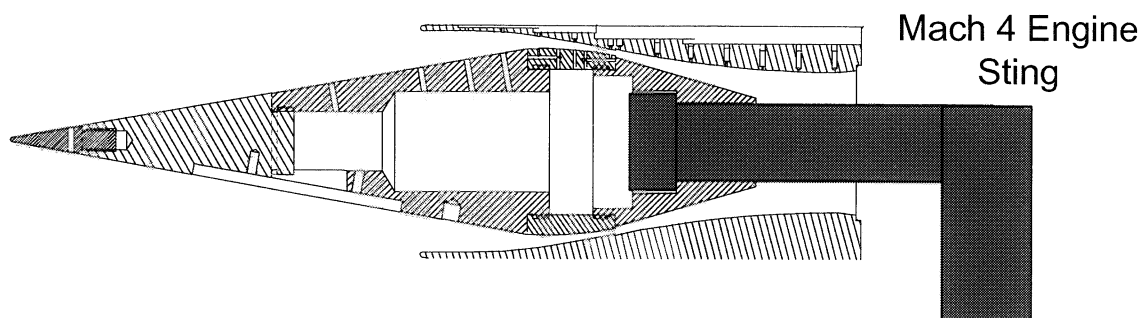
APL-10C Engine with Mach 4 Inlet Testing Sting
